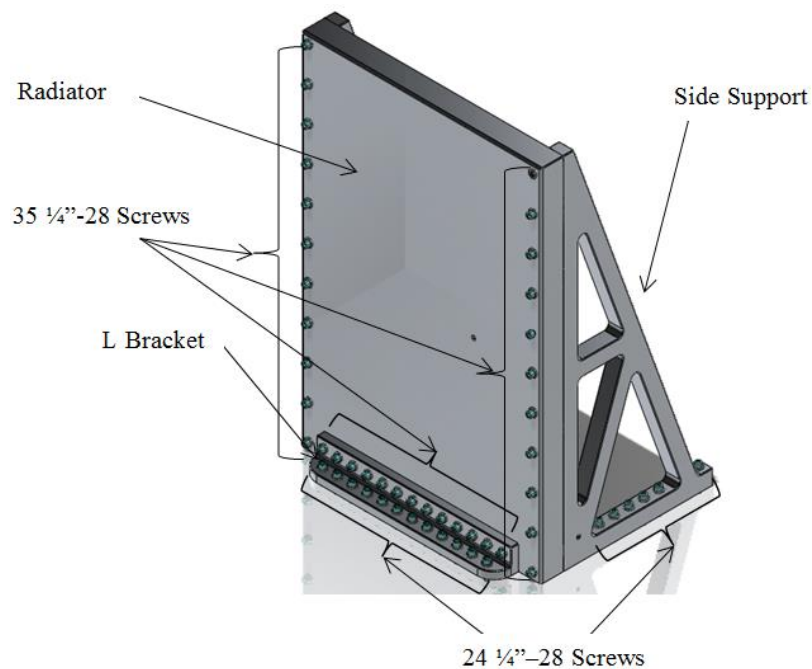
ATT experiment structure (shown without the cold plate or cold plate mount).
